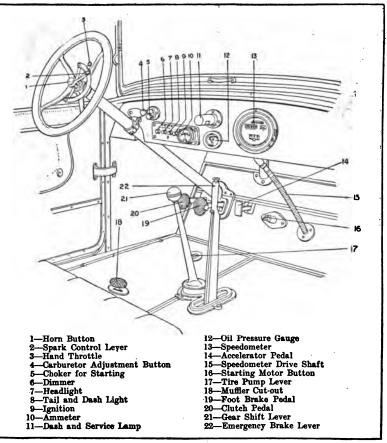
Control System of Cole Eight With All Parts Clearly Indicated.
